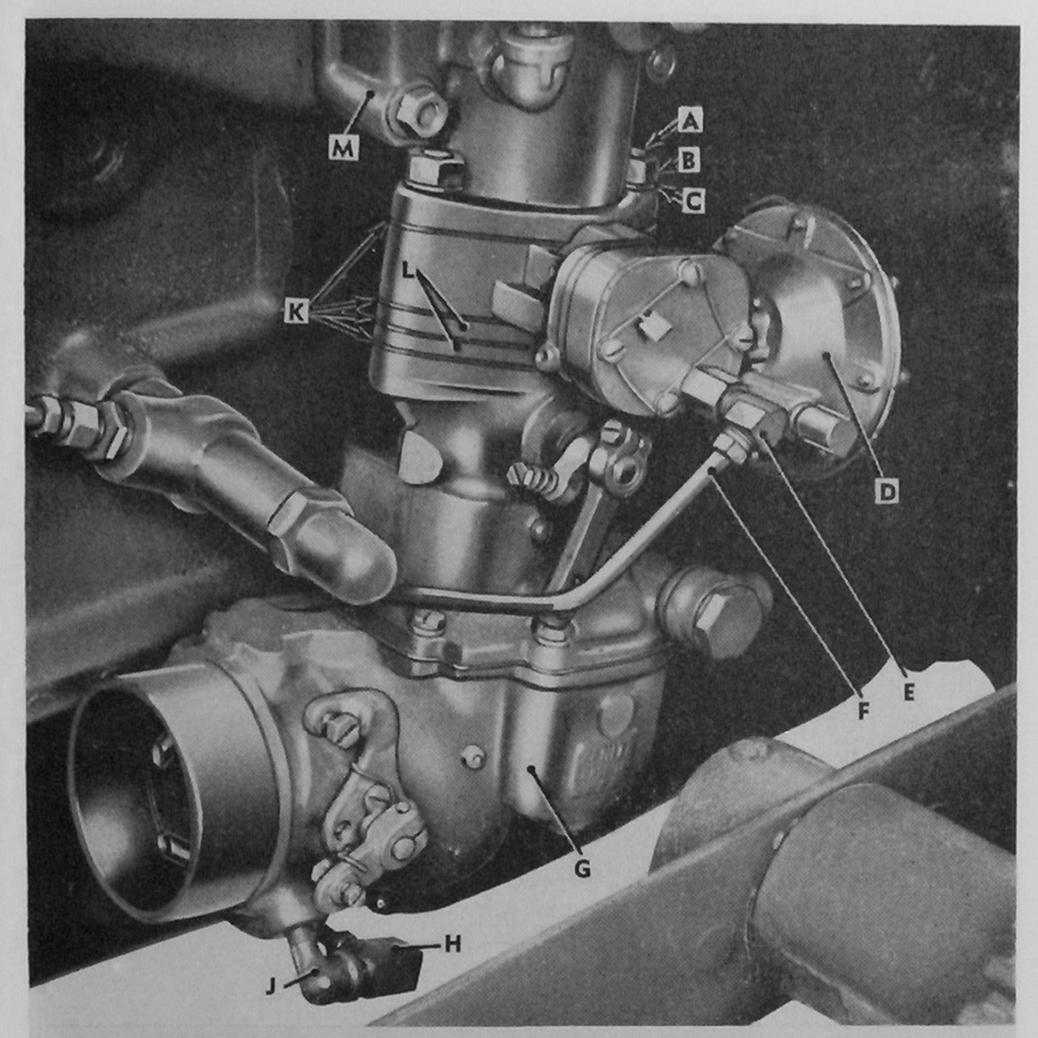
Carburetor and throttle controls installed—engine assembly 8329440 and late engine assembly 7411599.
